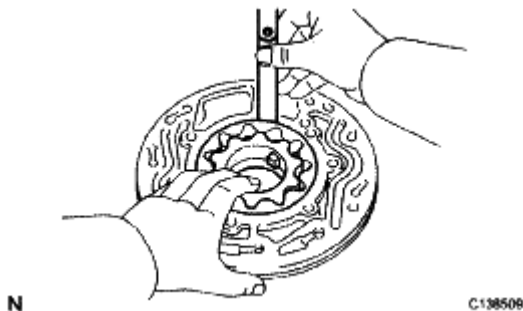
Measuring Clearance Of Front Oil Pump And Gear Body Sub-Assembly
